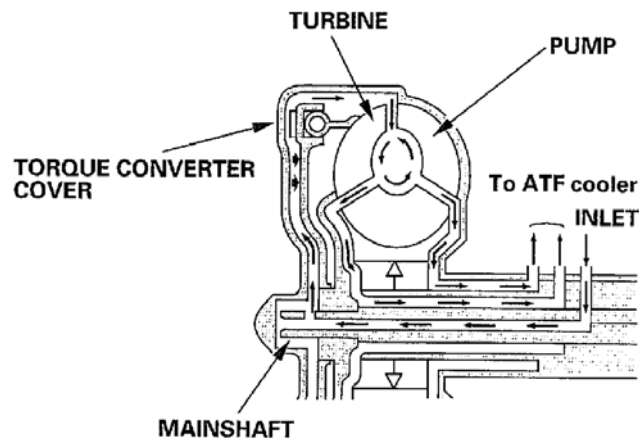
Torque Converter Clutch Lock-up ON (Engaging Torque Converter Clutch) Fluid Flow
